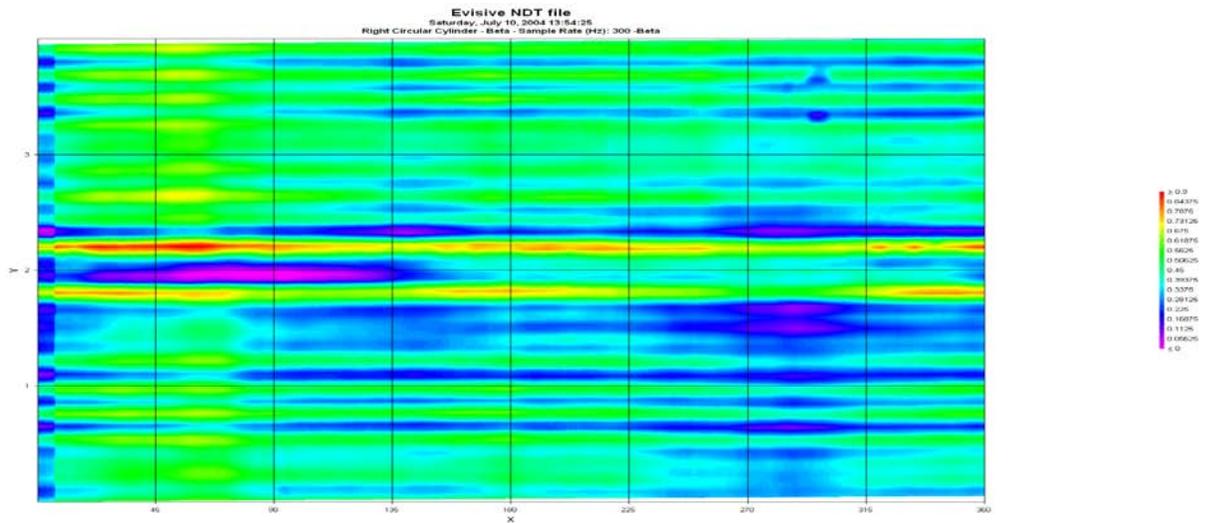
Evisive Scan image of an unacceptable HDPE Thermal Butt Fusion Weld (flaw is lack of fusion due to uneven assembly pressure)
